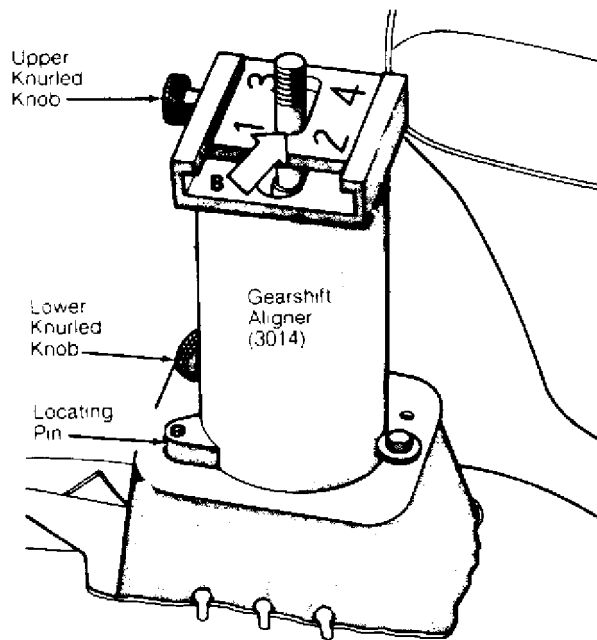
Gearshift Aligner (3014) Installed On Fox
